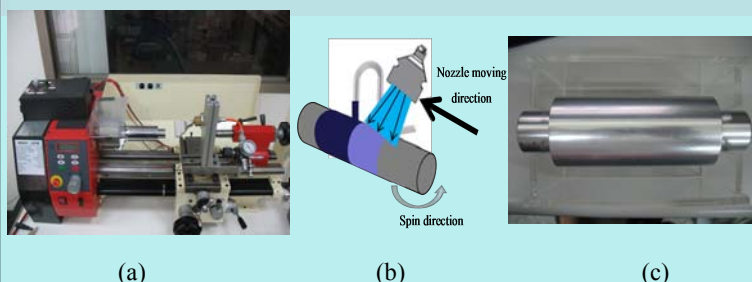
(a) Experimental setup of an air-nozzle-based coating system on a lathe, (b) The mechanism for coating a thin film on the roller, (c) The stainless roller used in the experiments.
